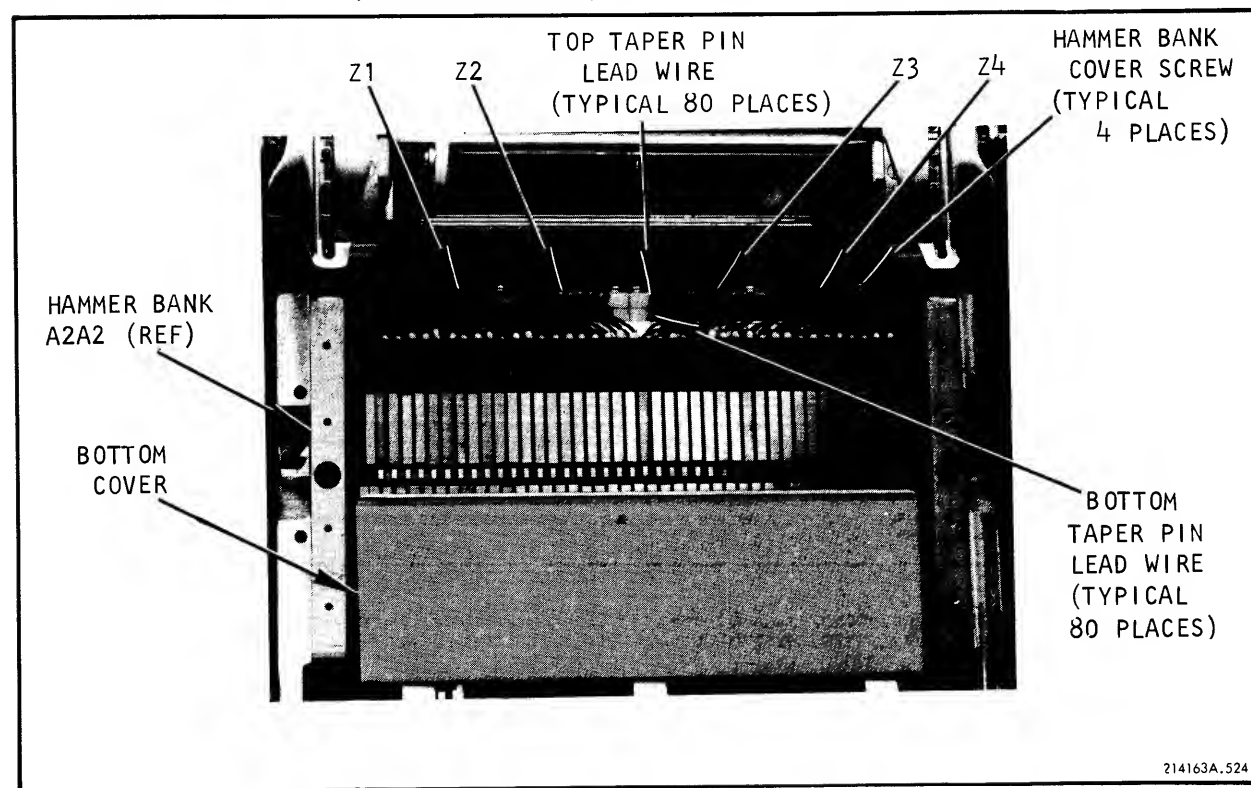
Hammer Bank A2A2 Cover (Top Cover Shown Removed)
